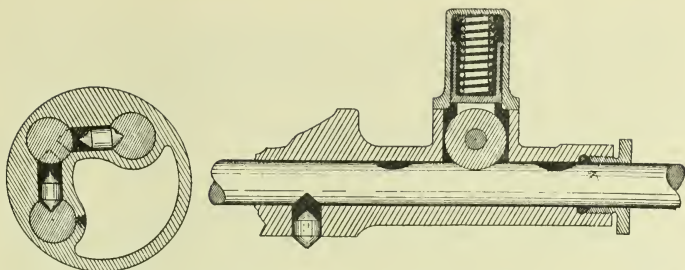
THE LOCKING MECHANISM USED ON THE SHIFT ROD OF THE FOUR-SPEED GEAR TRANSMISSION
